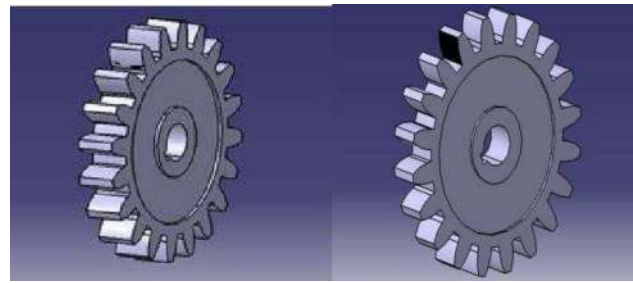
Pitting faulty gear Figure 4: Wear faulty gear
